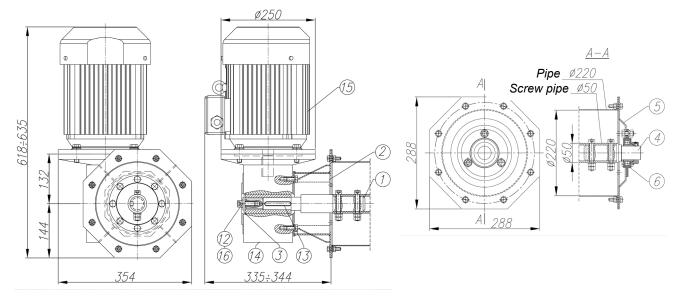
PS220-N4/300-screw conveyor \neg 220 – a drive of power P=4kW, n=300 rpm
